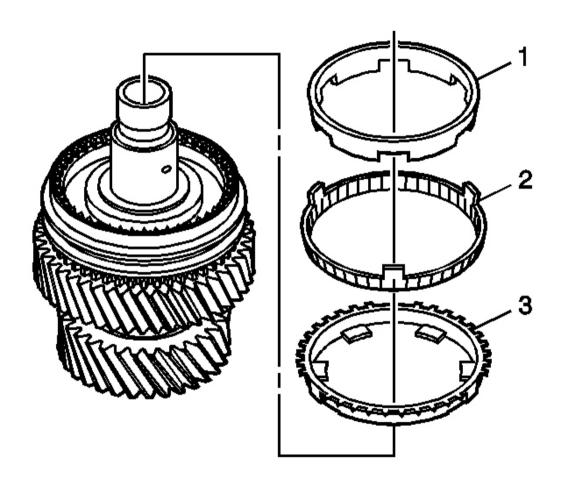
1st Gear Outer/Inner Cone & Blocking Ring Courtesy of GENERAL MOTORS CORP.
